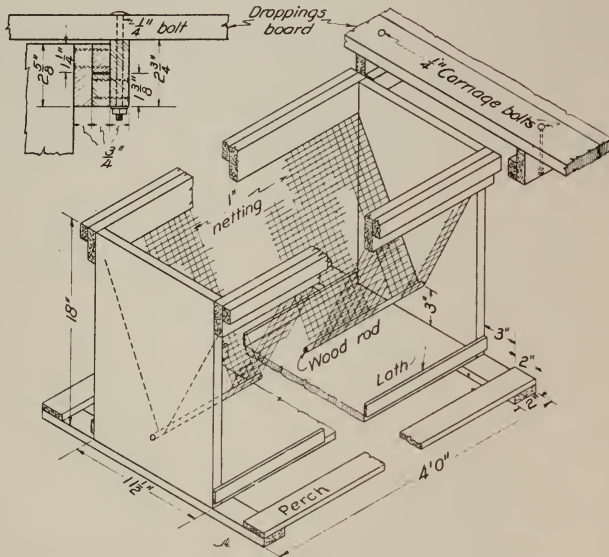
Plan for the construction of green feed hopper shown in figure 85.
